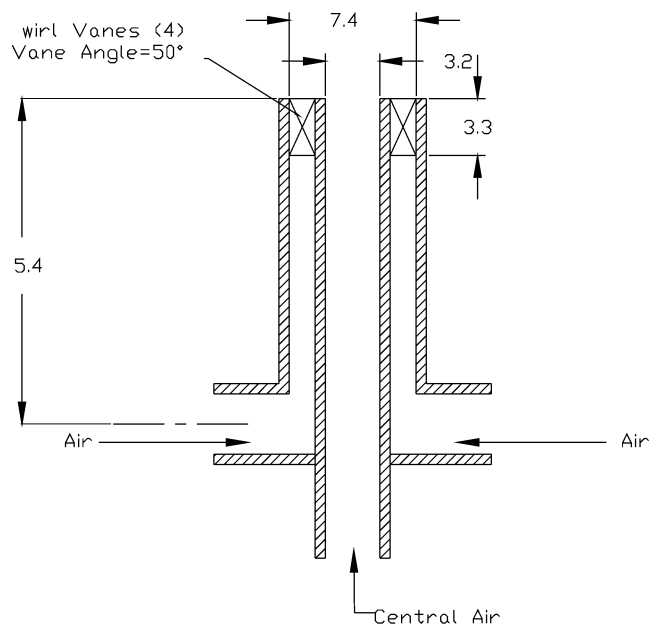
Schematic of the CSSI; dimensions in millimeters.
